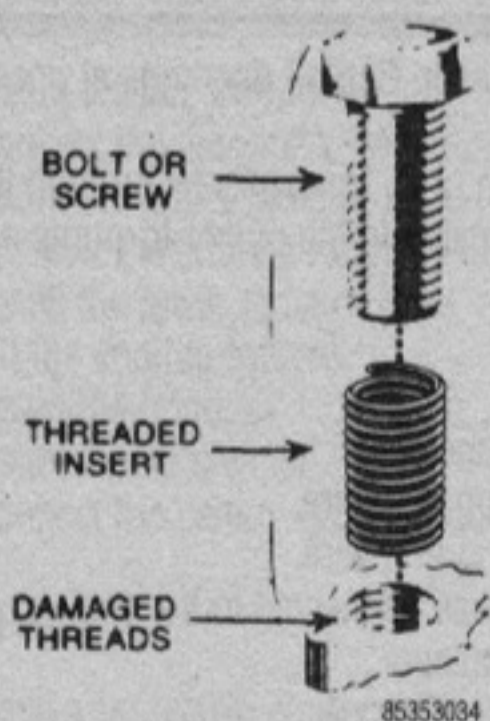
Damaged bolt holes can be repaired with thread repair inserts
